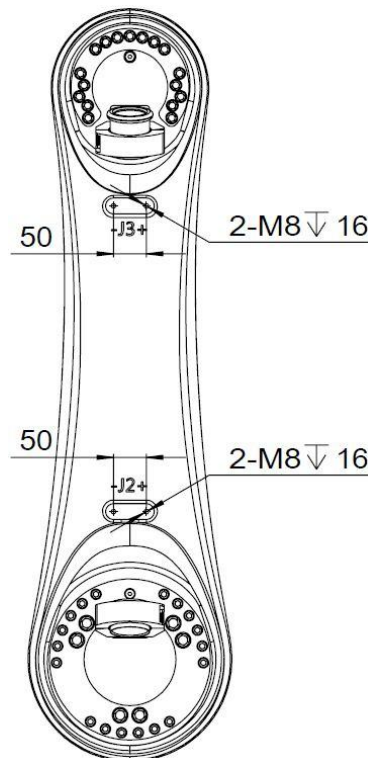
Interface dimensions of the main arm for RX3-A650-2260/RX3-A680-2260 manipulators
